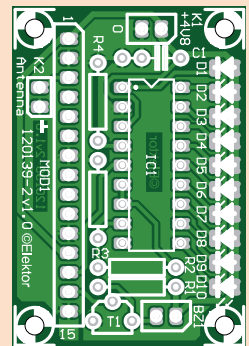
The Transmitter board is double-sided and takes SMD parts; the Receiver board is a single-sided design for through-hole parts. TX board shown at 150 % of true size.
